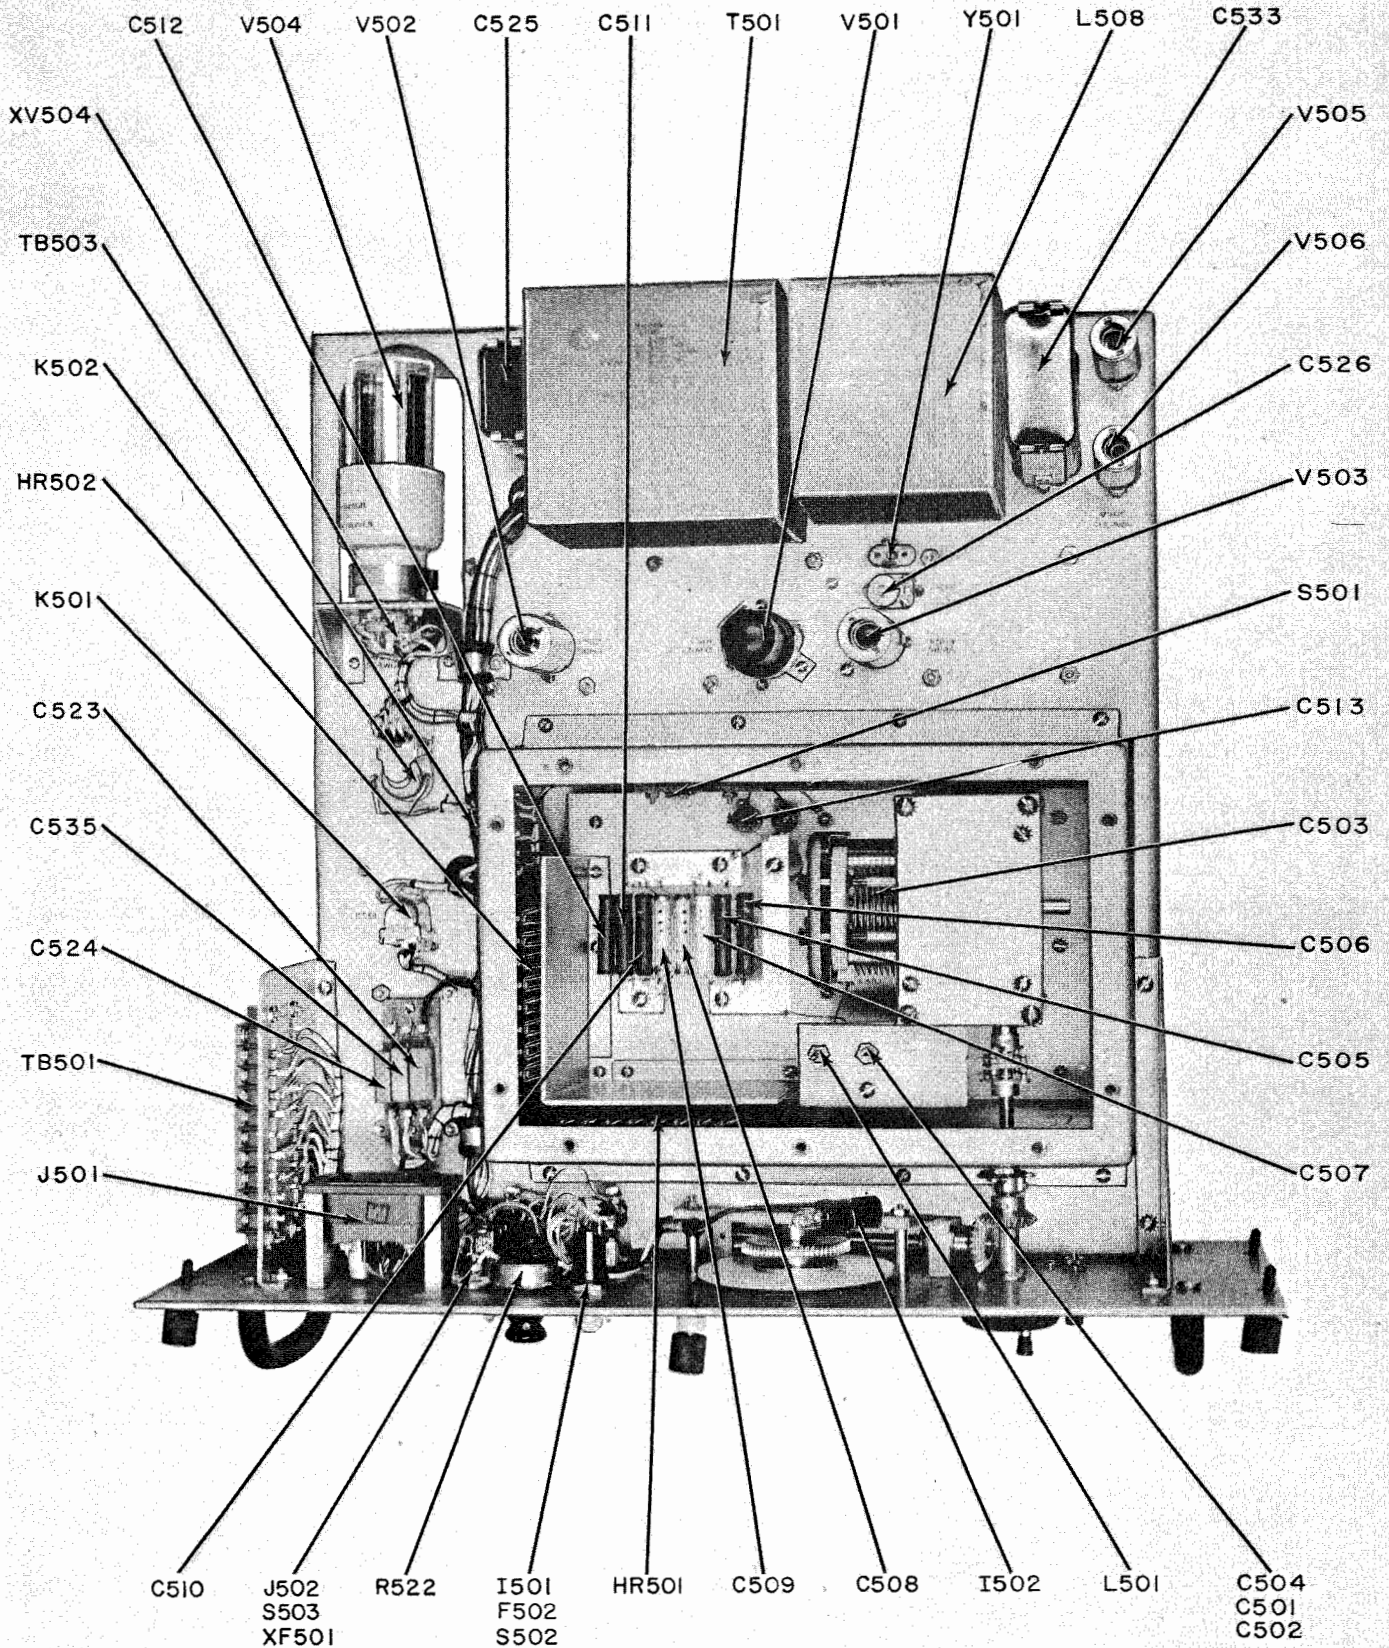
Radio Frequency Oscillator 0-332(XN-1)/SRT-17, Top View, Cover Removed
